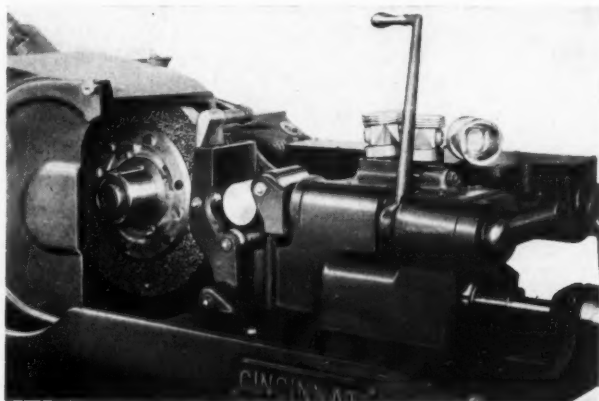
Centerless grinder can be adapted to handle a variety of cam-shaped parts
